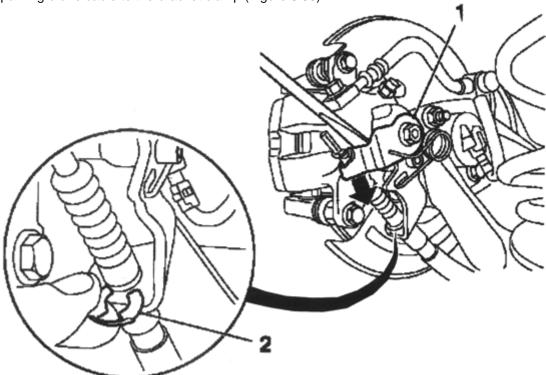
Accession cable stoyanoch-Term Brake system:
